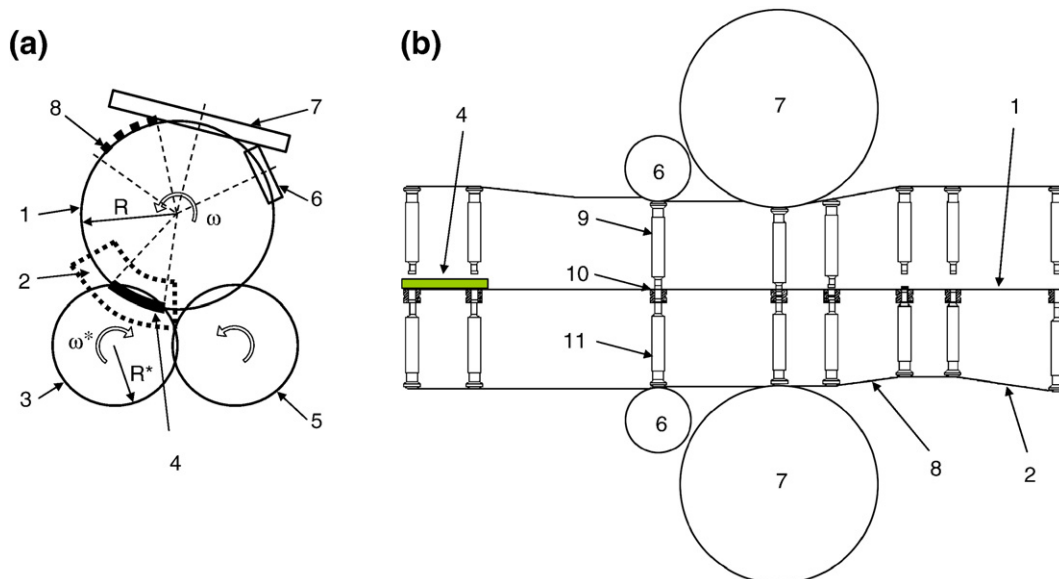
Rotary press production cycle a) top view, b) unfolded view; 1 — die table, 2 — fill cam, 3 — feed wheel, 4 — die fill area, 5 — metering wheel, 6 — pre-compression roller, 7 — main compression roller, 8 — ejection cam, 9 — upper punch, 10 — die, 11 — lower punch.
